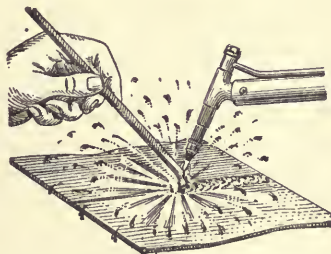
The metal added must not fall drop by drop into the weld.
